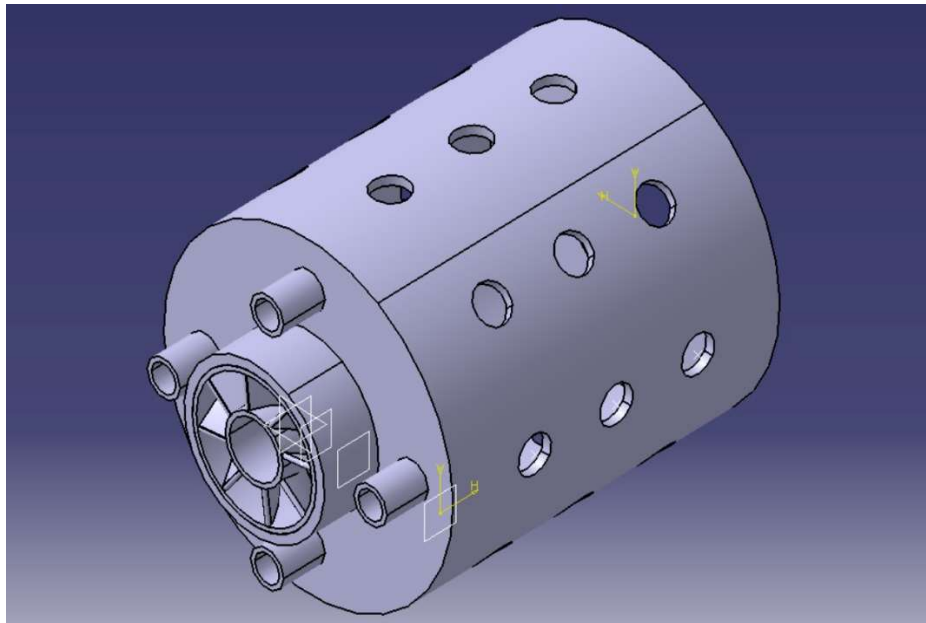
(a) *Isometric view Axial Flat Type with Combustion Chamber.
